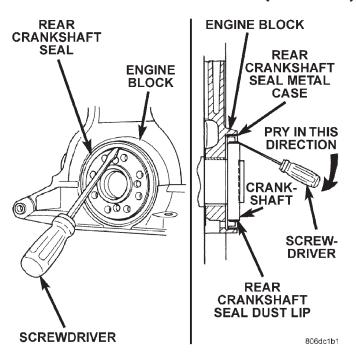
Rear Crankshaft Oil Seal—Removal INSTALLATION
